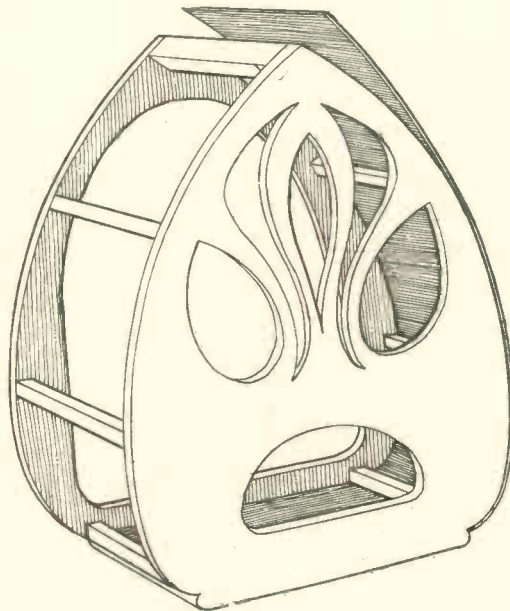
CONSTRUCTION DETAILS OF TABLE CABINET.
